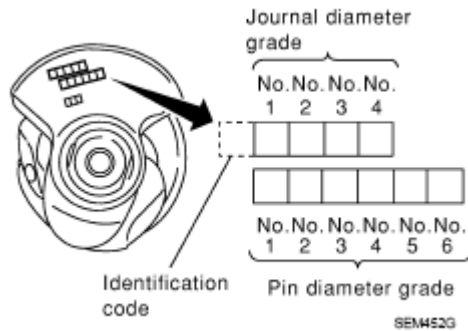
Applying Journal Diameter Grade Stamped On Crankshaft Front Side To Column
